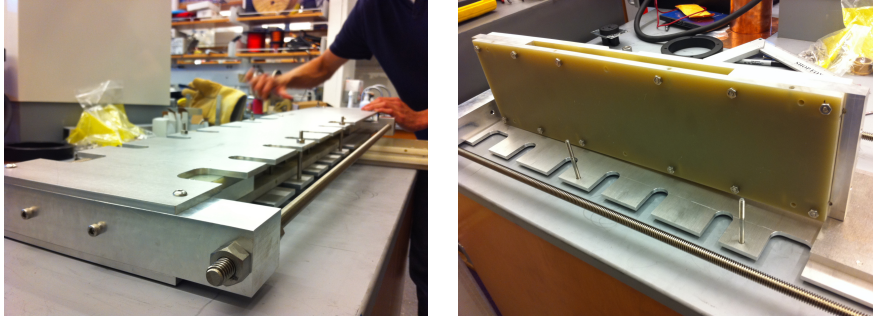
Hardware Assembly. Six magnet sections are assembled into each of the two Halbach quadrupole segments. The assembly jig was needed to create the force necessary to align the six permanent magnet sections side-by-side.
